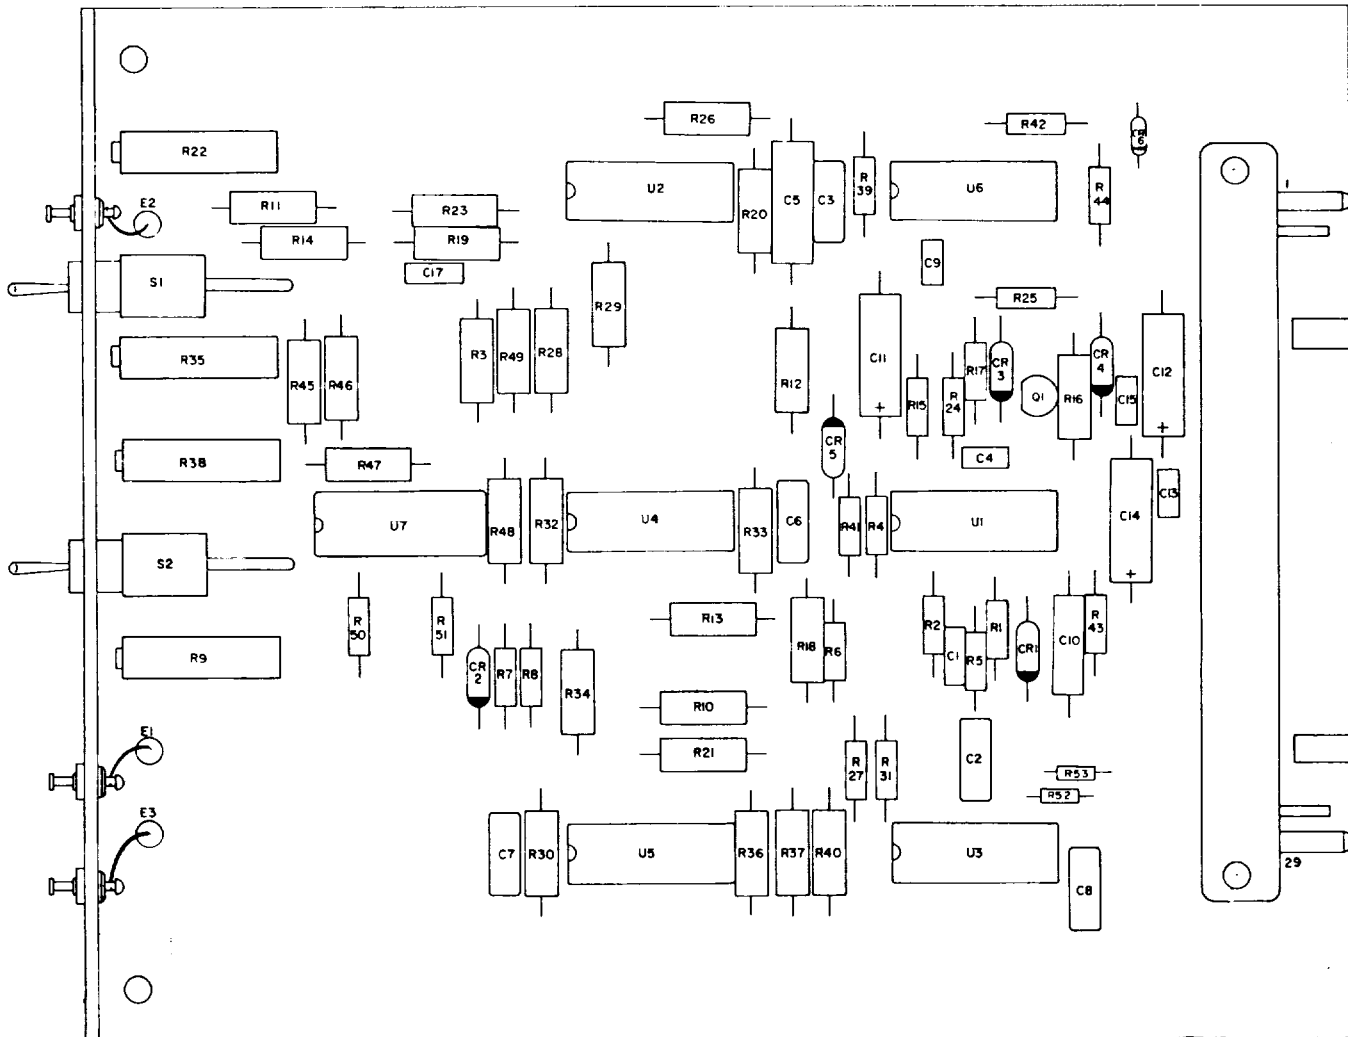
Variable Signal Processing Circuit Card Assembly, 1A3A3 Part Location Diagram
